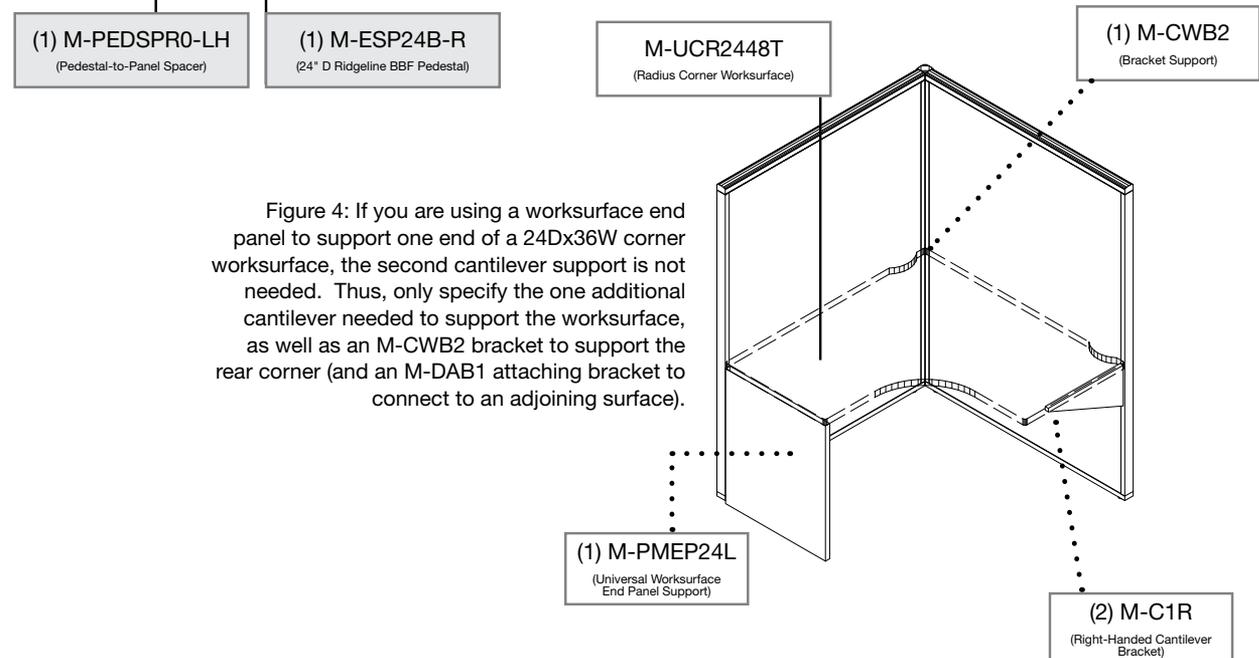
If you are using a worksurface end panel to support one end of a 24Dx36W corner worksurface, the second cantilever support is not needed. Thus, only specify the one additional cantilever needed to support the worksurface, as well as an M-CWB2 bracket to support the rear corner (and an M-DAB1 attaching bracket to connect to an adjoining surface).
